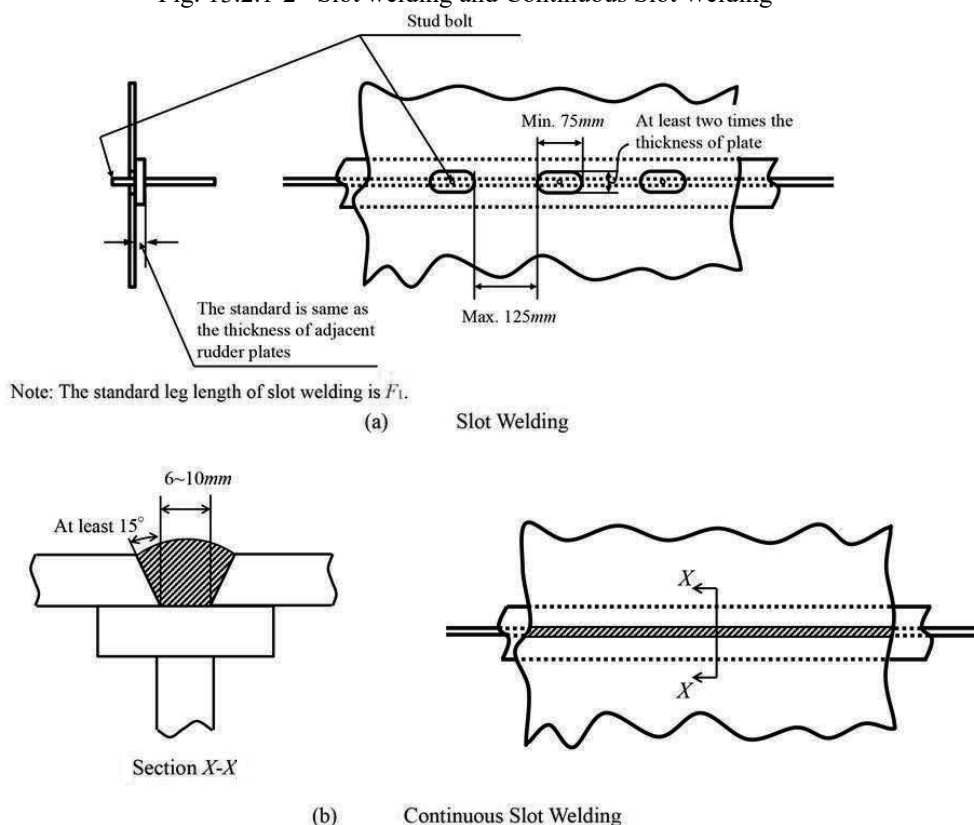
Slot welding and Continuous Slot Welding
